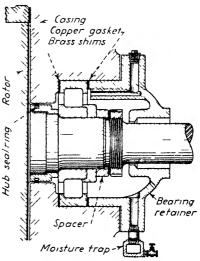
Bearing construction and shaft seal ring (Courtesy of Fuller Co)
